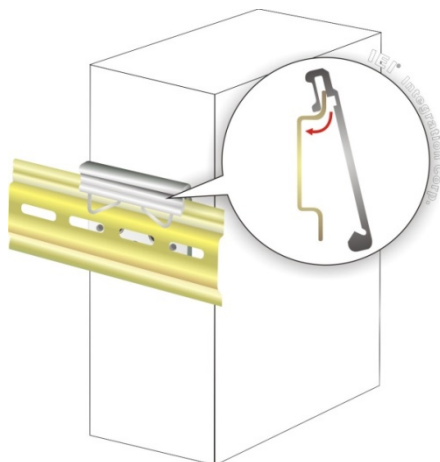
Attach the Mounting Bracket to the DIN Rail
